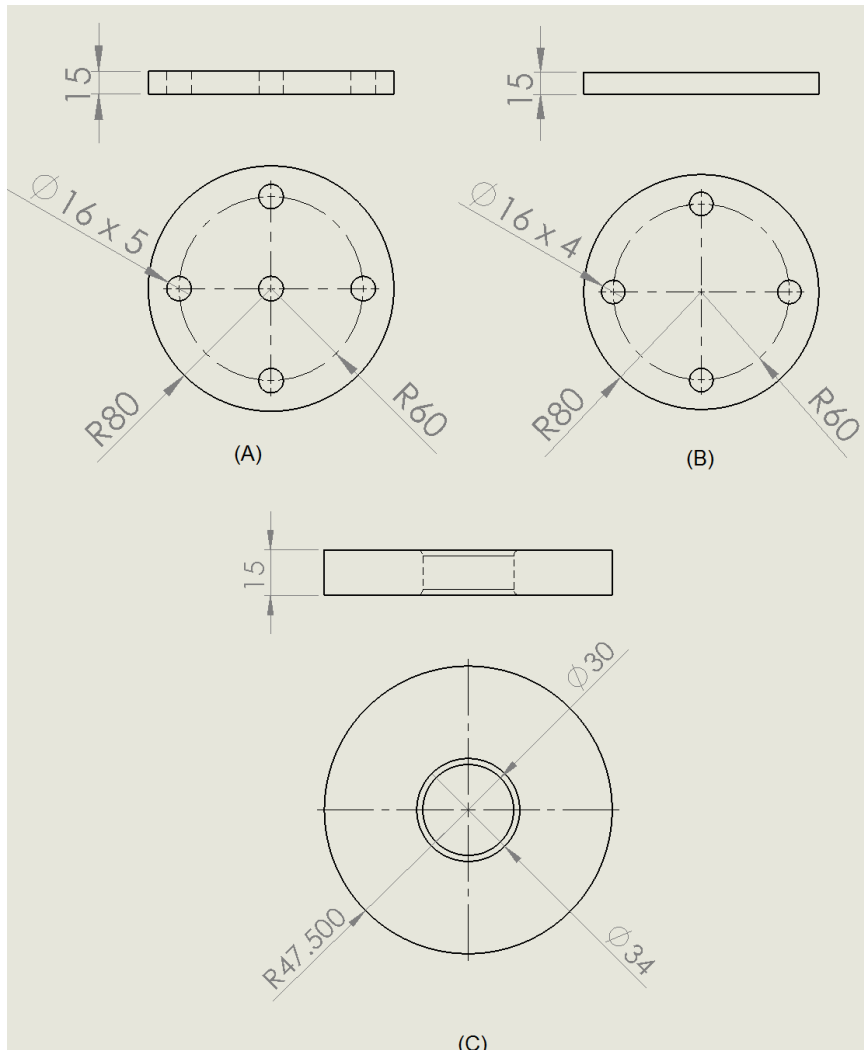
Detail dimensions (A) upper flange; (B) lower flange; (C) gasket
